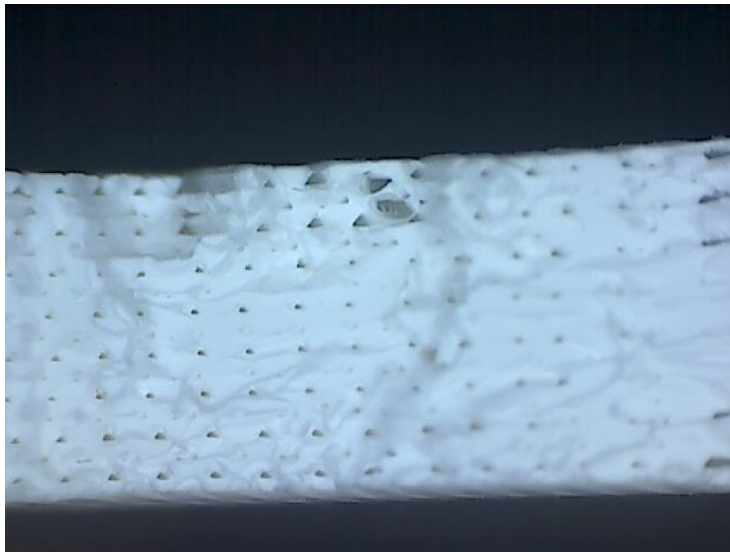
Fracture surface of a +/- 30° toolpath orientation continuous build ABS tensile specimen.
